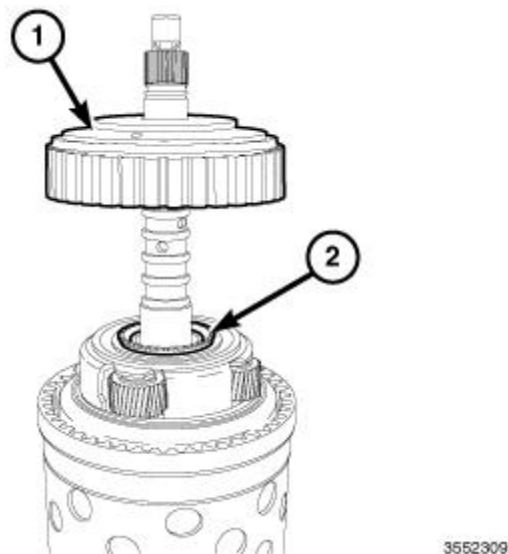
P1 Annulus/B-Clutch Hub Assembly, Needle Bearing And Holding Plate
